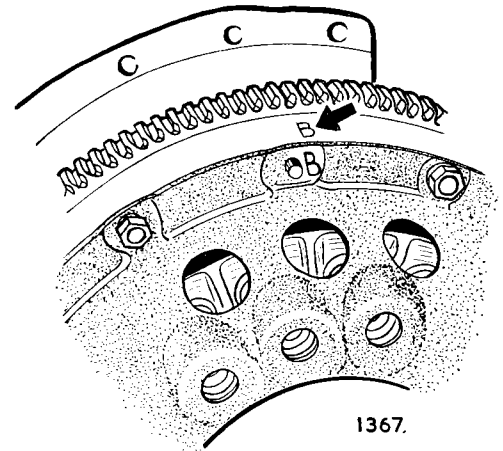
Showing the balance marks 'B' on the clutch and flywheel
